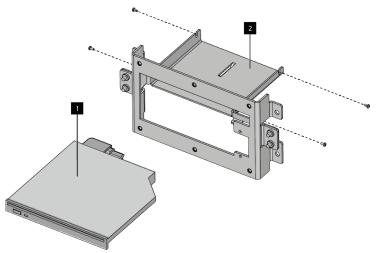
Removing the CD/DVD drive from the drive mounting bracket
